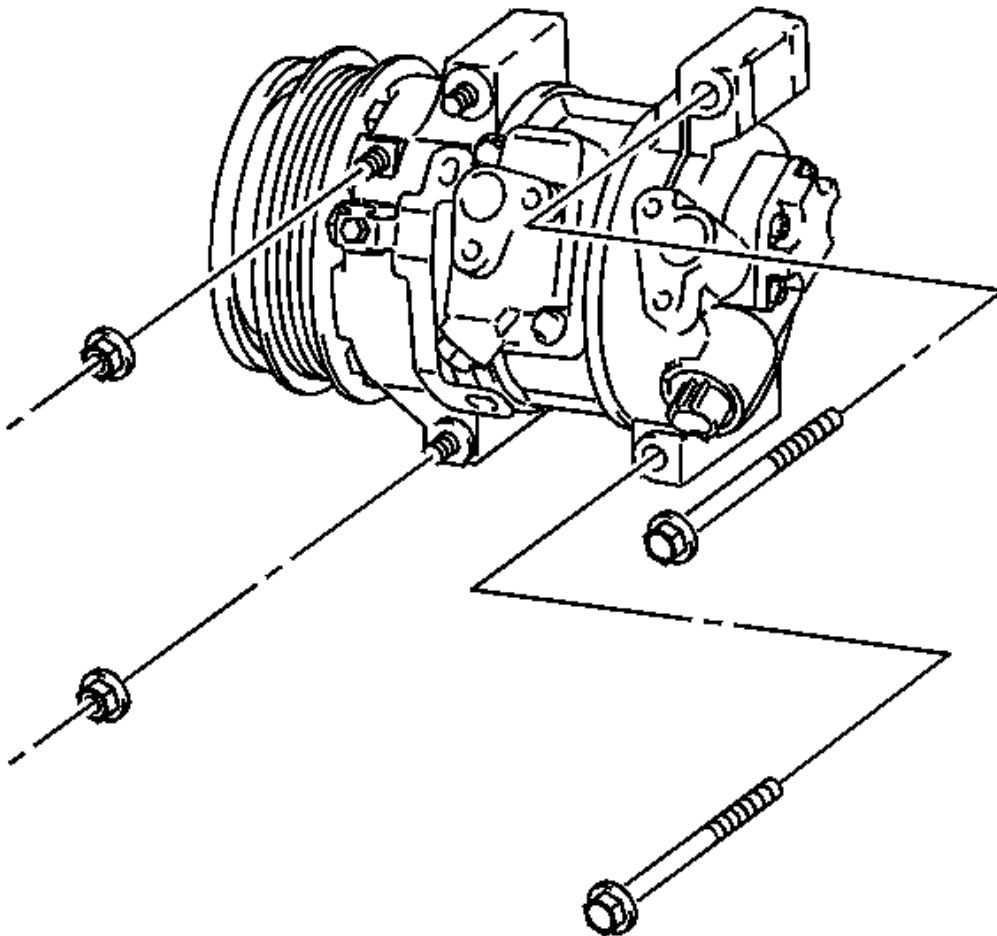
Identifying A/C Compressor Bolts & Nuts
